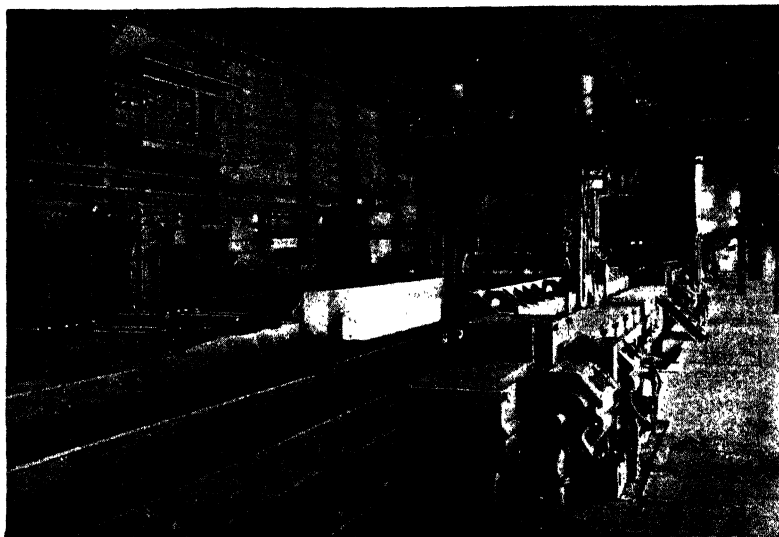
XI.—Two-high reversing blooming mill. (Courtesy of The Mesta Machine Co.)
